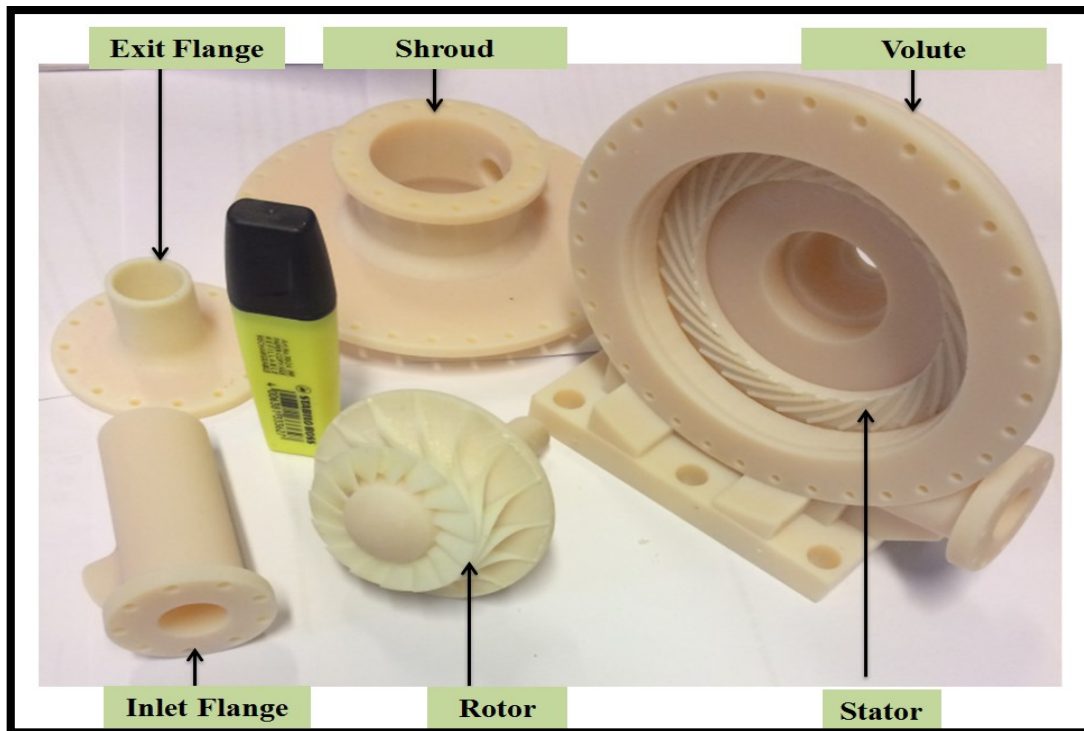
The (SSRT) parts manufactured using 3D printing technology.
